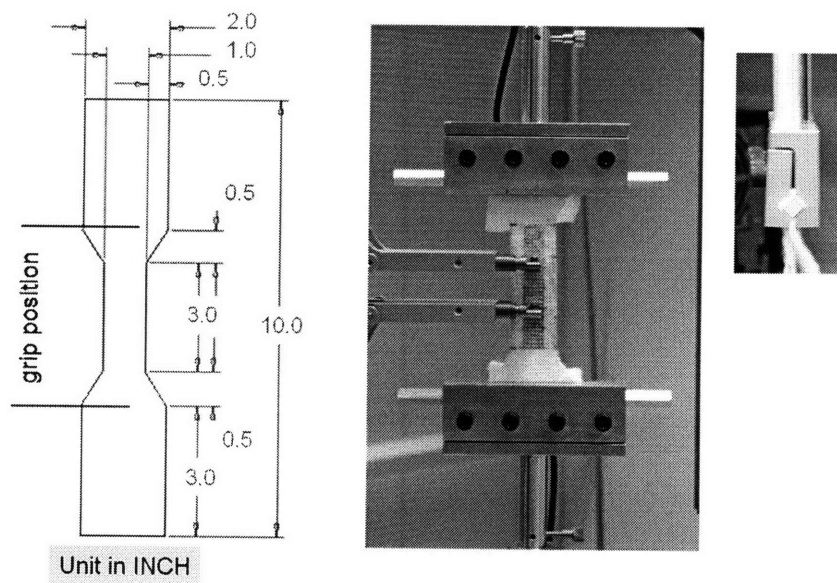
Dogbone specimen (left) and custom designed fabric fixture – front view (middle) and side view (right). Each end of the fabric strip is wrapped around a bar, and then clamped between two grooved jaws of the fixture. A contact extensometer is used in this configuration
